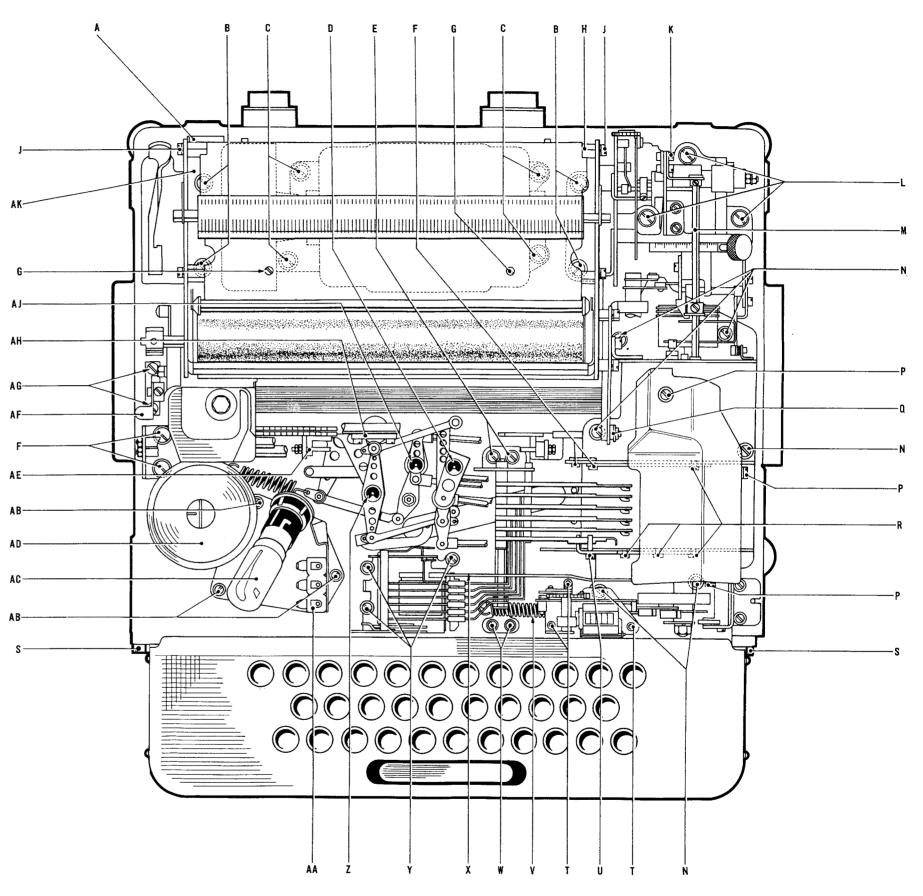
LOCATION OF UNIT SECURING SCREWS
